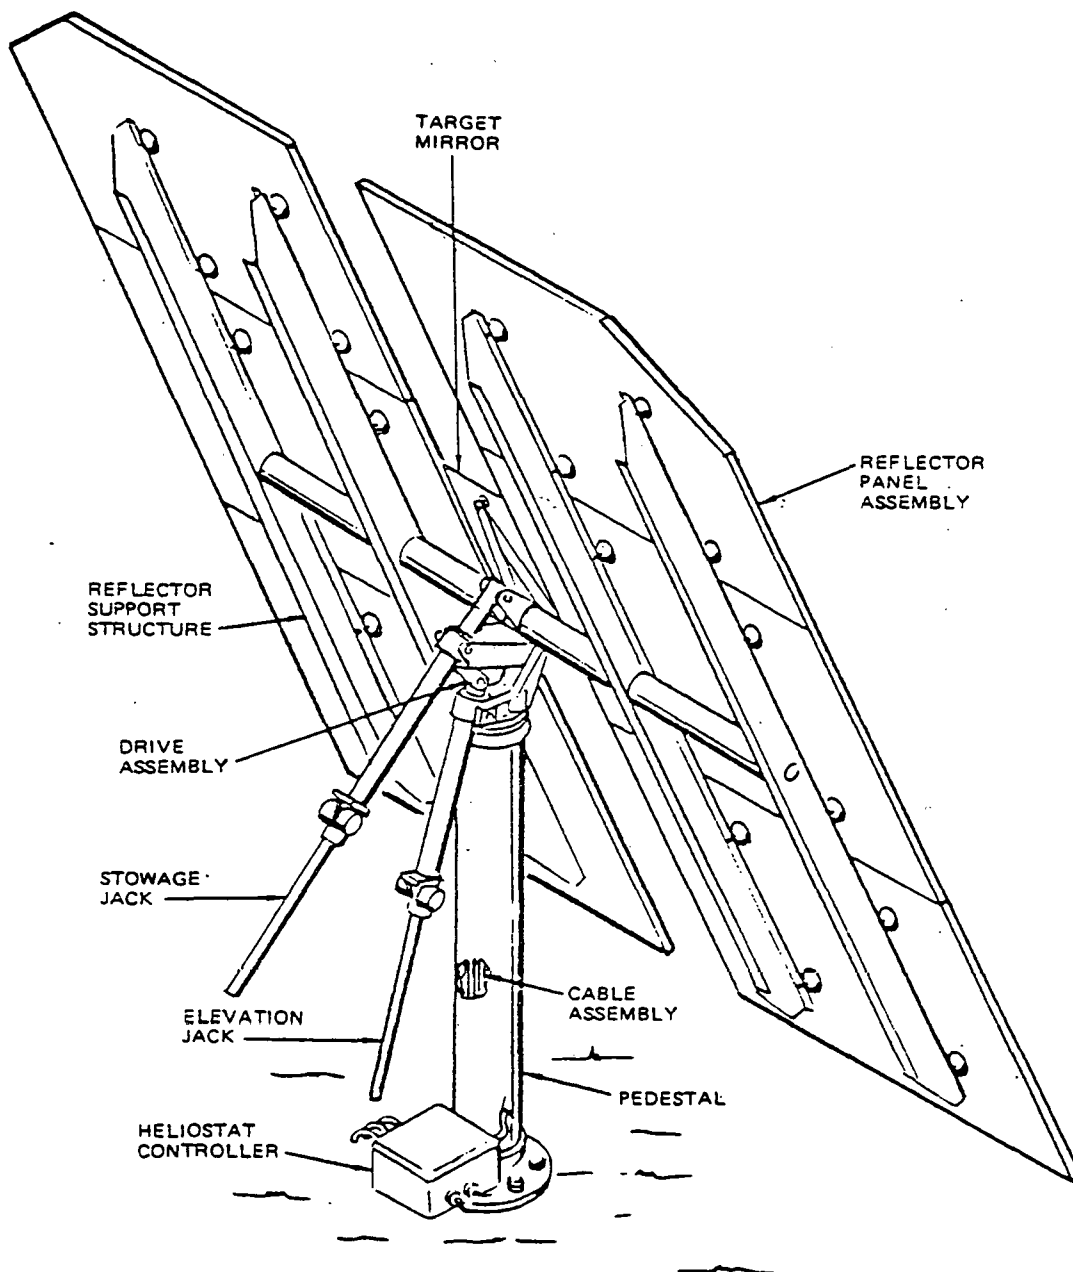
Heliostat Assembly - Initial Baseline Design
